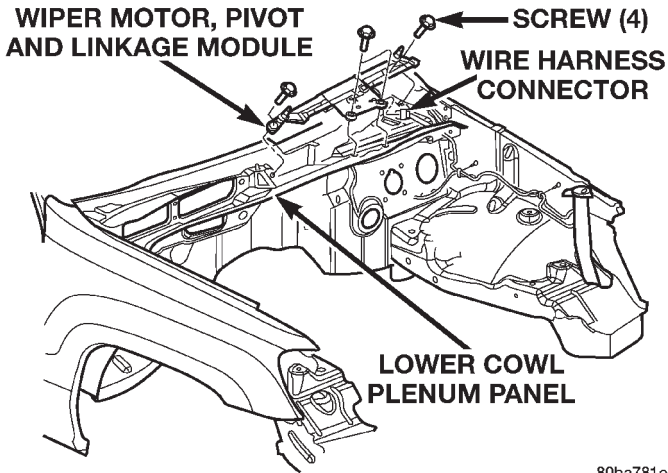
Wiper Motor, Pivot and Linkage Module Remove/Install
